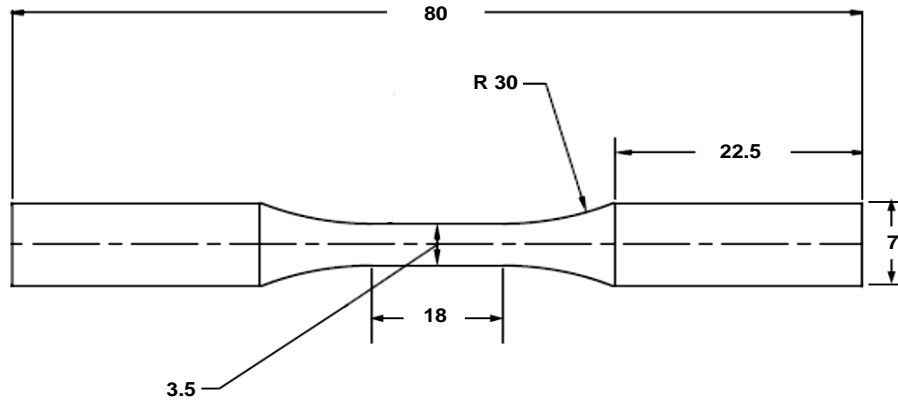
Specimen geometry for both monotonic tensile and fatigue tests (dimensions in mm) based on ASTM E606 standard.
